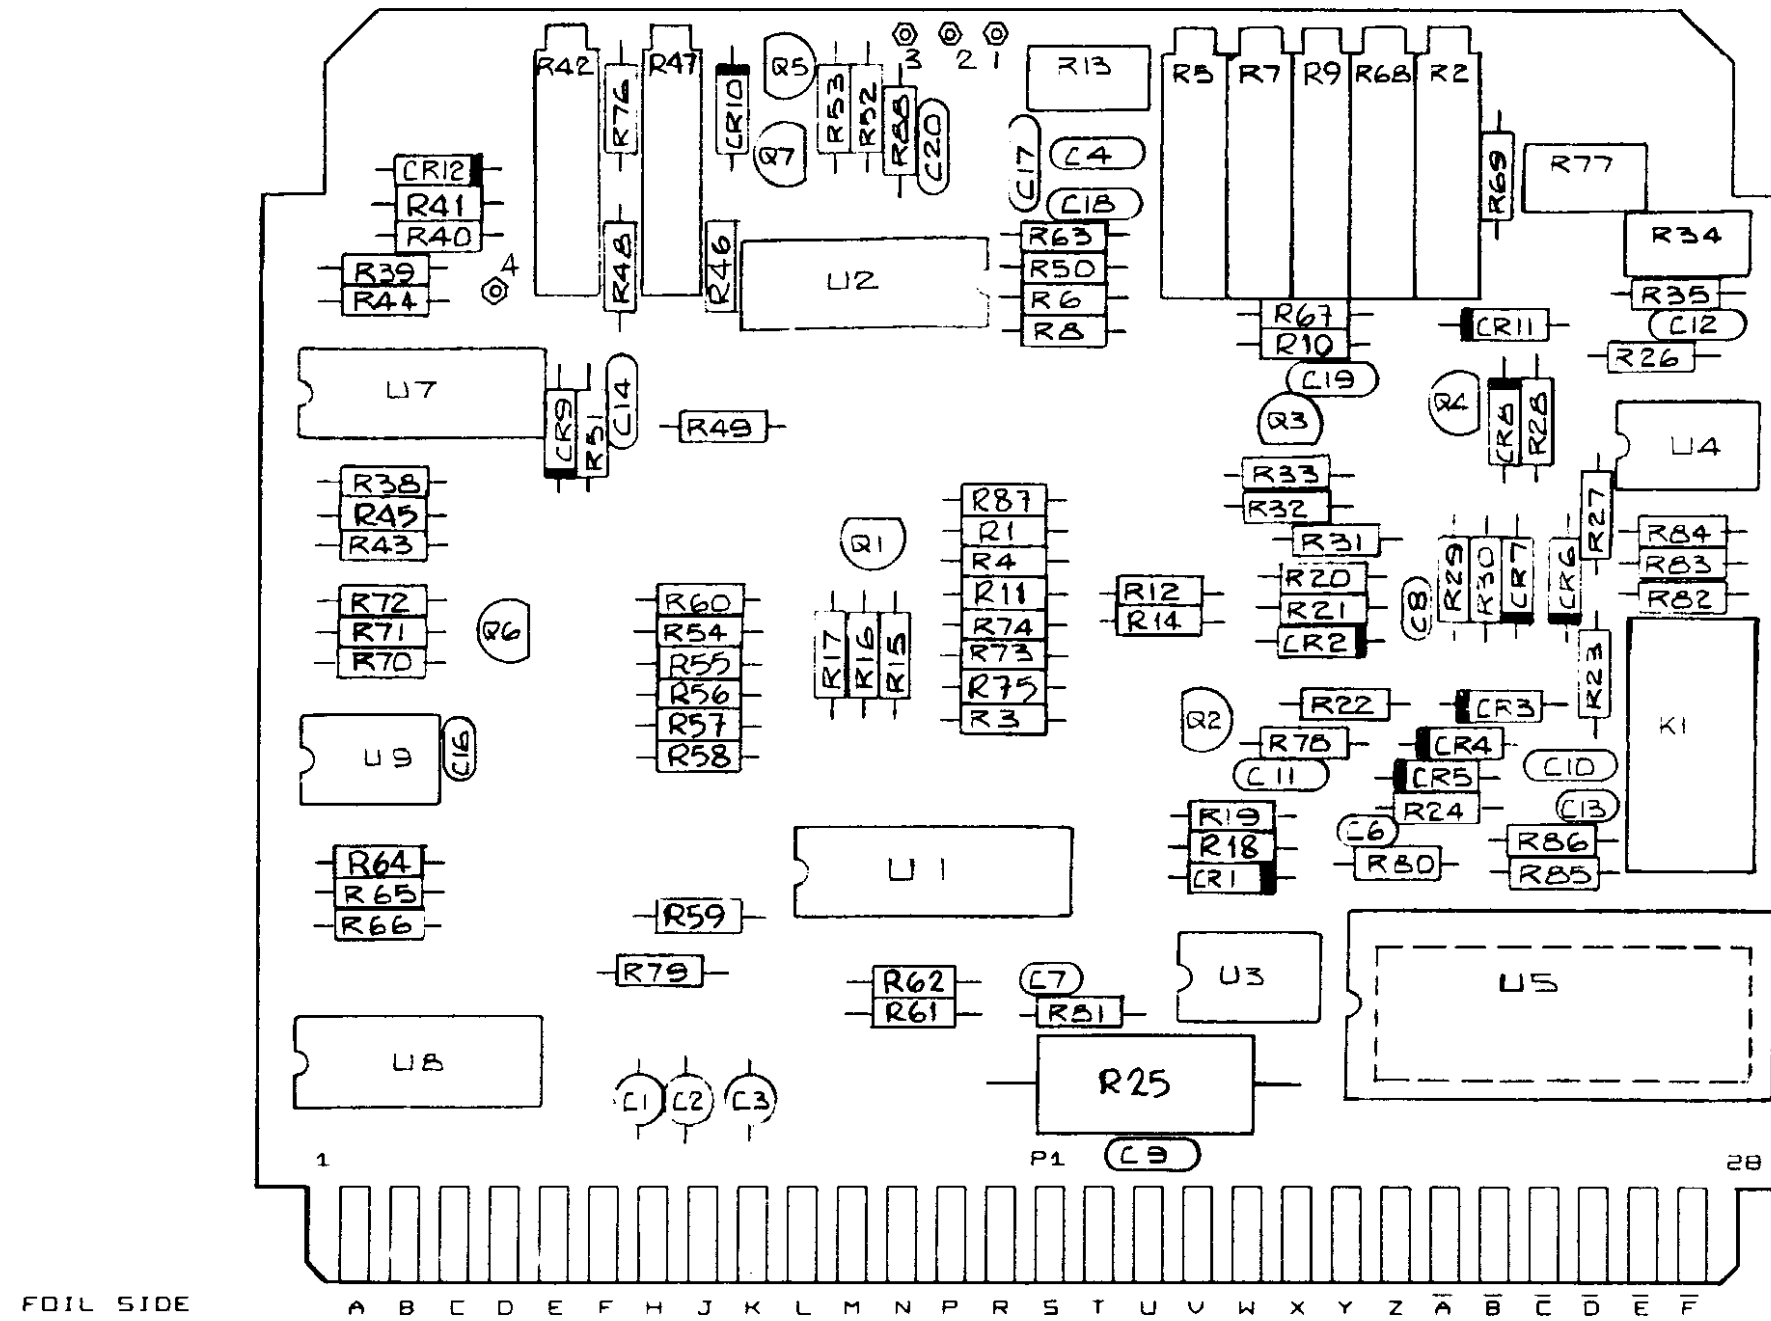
A1A6 YIG Driver PCB Parts Locator Diagram, Assy D8008-8
